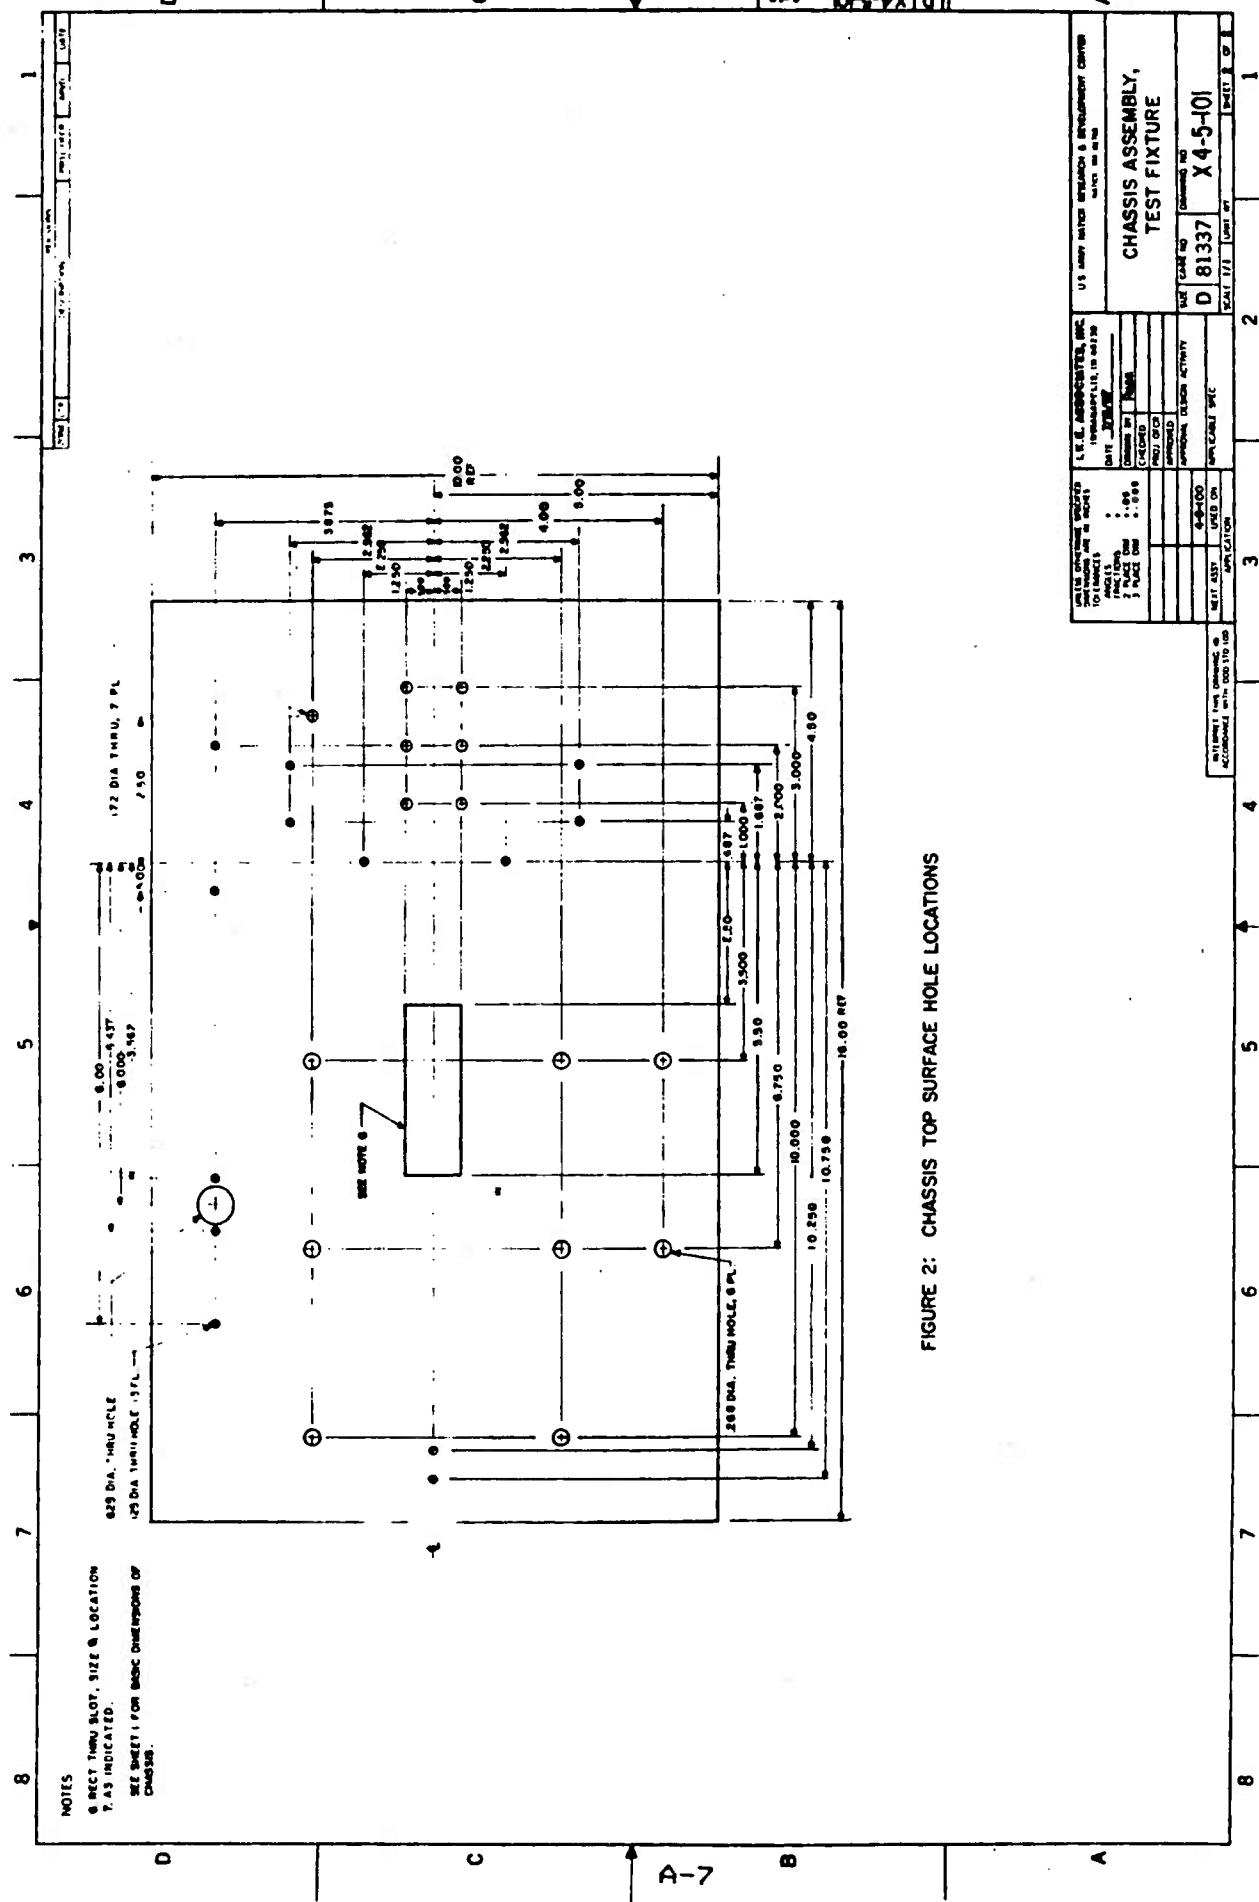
CHASSIS TOP SURFACE HOLE LOCATIONS
